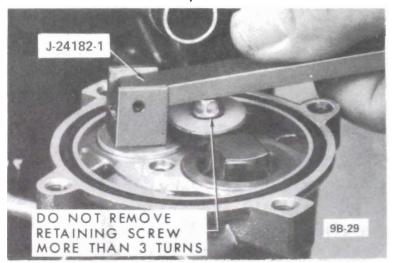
B-33 Capsule Removal Tool Attached to TX Valve Capsule
